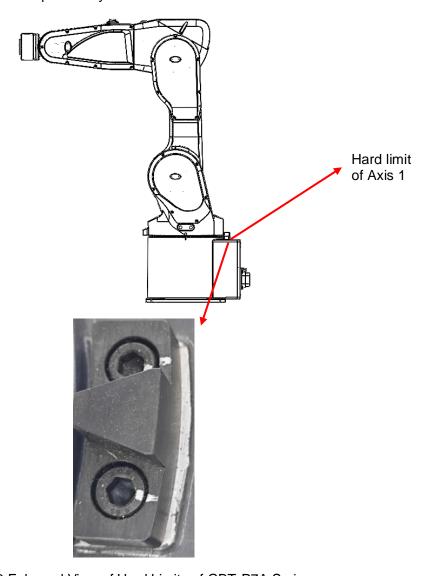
Enlarged View of Hard Limits of GBT-P7A Series
